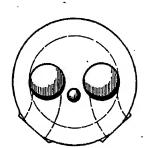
Plan of Cylinder Head of High-speed Engine.
